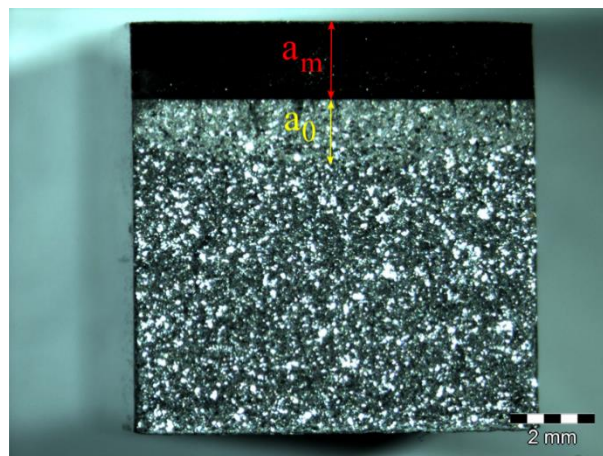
The fracture surface of the SENB specimen and specified crack lengths
